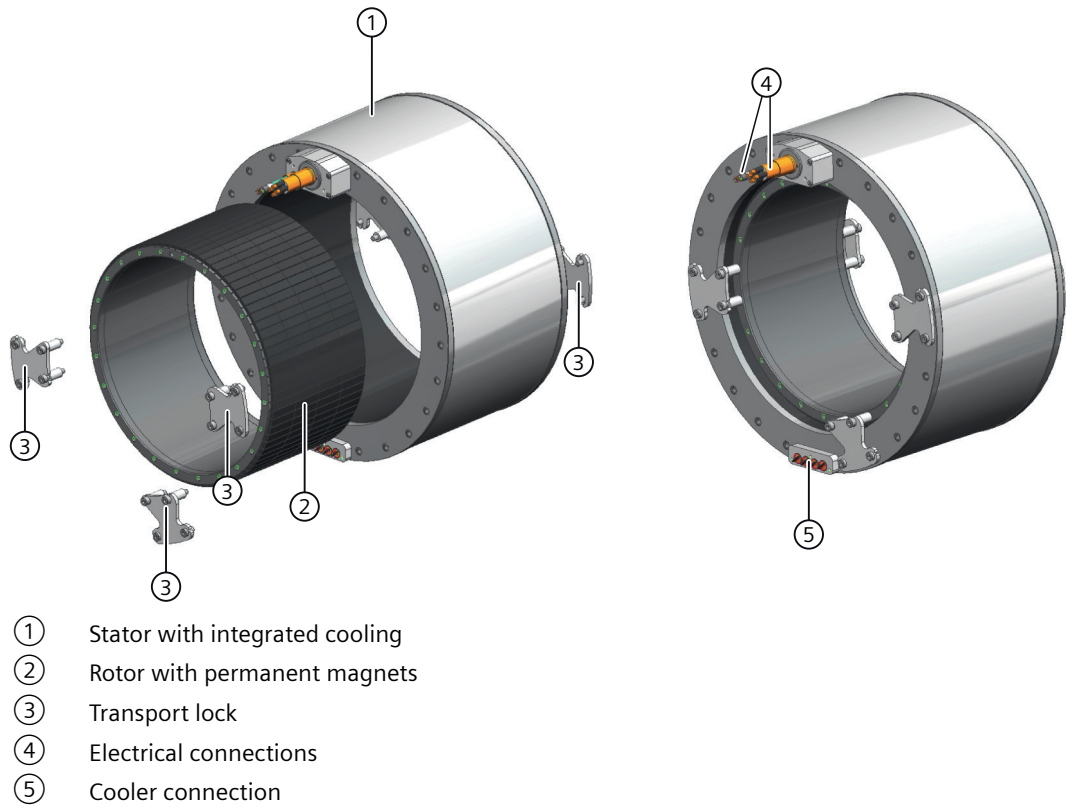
Motor components of the 1FW6160 to 1FW6290 built-in torque motors with integrated cooling (2 cooling circuits)
